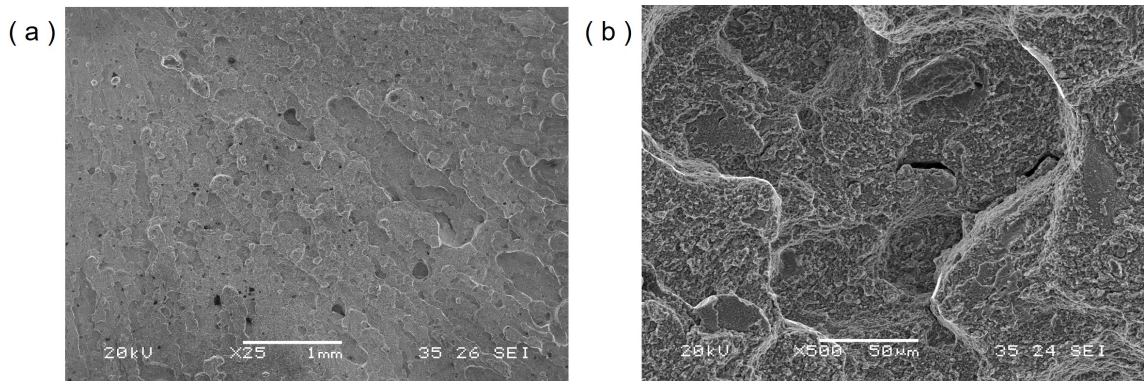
Fracture surface of L-PBF tensile specimens of FeMnAlC-2Si-05Ti steel printed at different magnifications (a) x25 and (b) x500.
